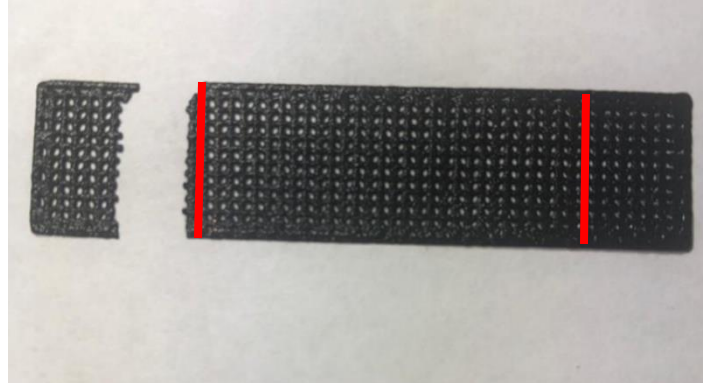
Fracture location of 3D printed tension sample with location of tensile grips (red)
